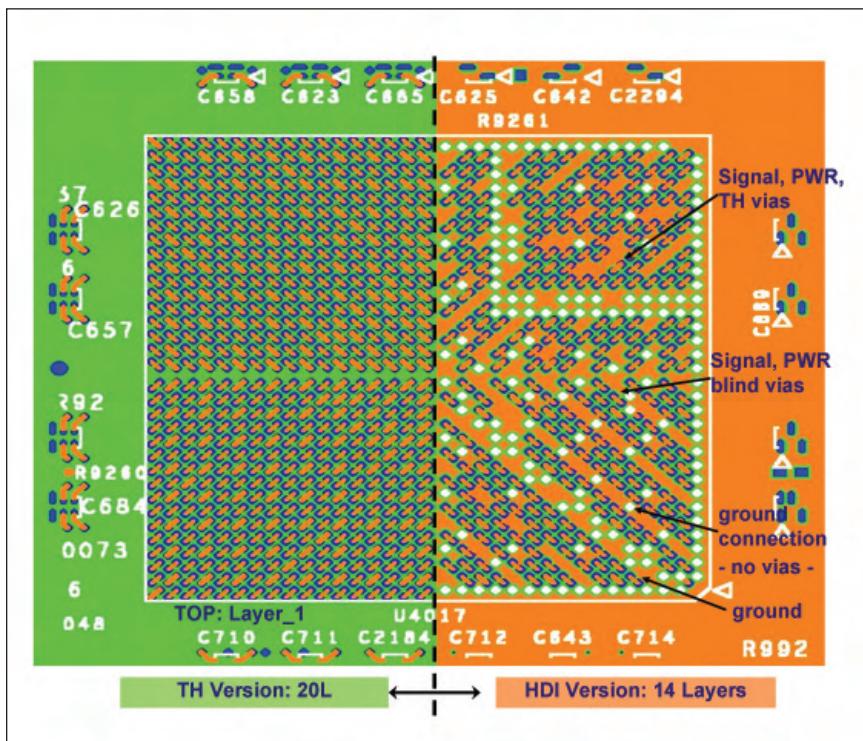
The top side of this multilayer shows where the blind via boulevards are arranged, with the top half-using L-shaped and bottom half-using diagonal boulevards.
